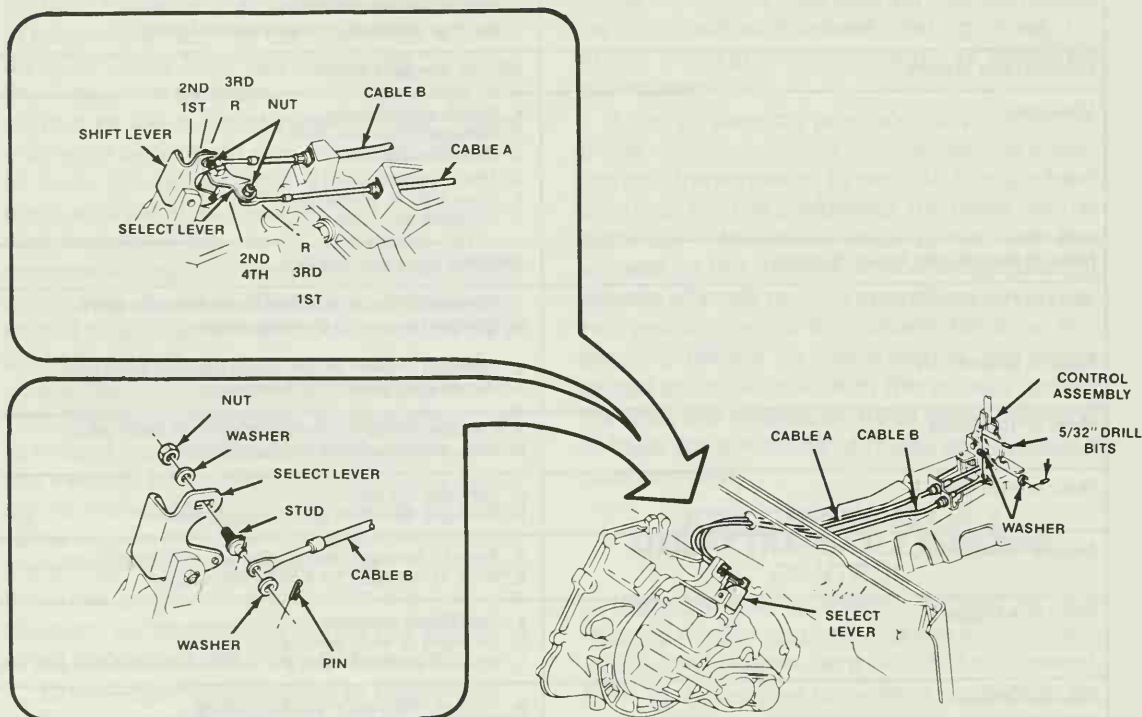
Shift cable adjustment procedure. (Chevrolet Motor Division of General Motors Corporation)
